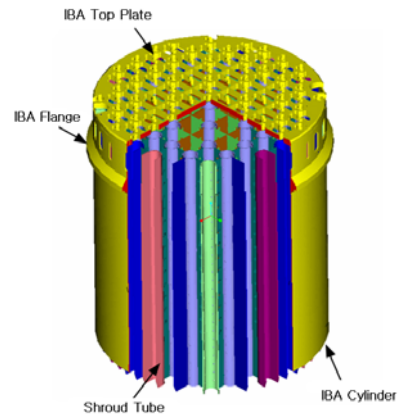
Inner Barrel Assembly of Reactor Vessel Internals
